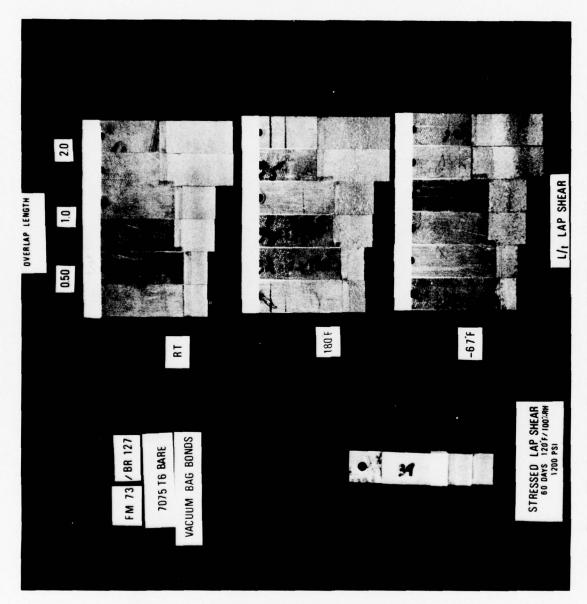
Specimen Failure Surfaces—FM 73, PasaJell 105, Vacuum Bag Bonds
